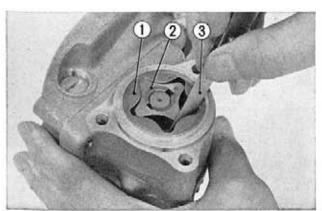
① Outer rotor ③ Thickness gauge ② Inner rotor
